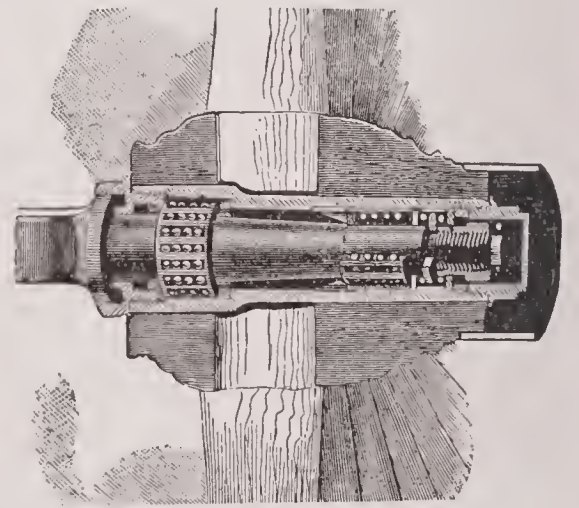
HUB WITH DOUBLE RADIAL AND DOUBLE END THRUST BALL BEARING.
